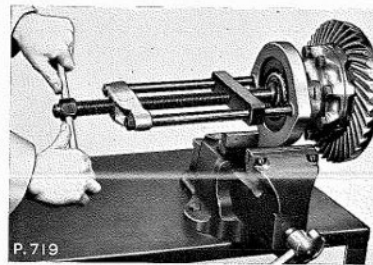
Withdrawing the bearing cone from the differential case, using the Churchill Tool R.G.4221B, and the adaptor set R.G.4221B-18A
